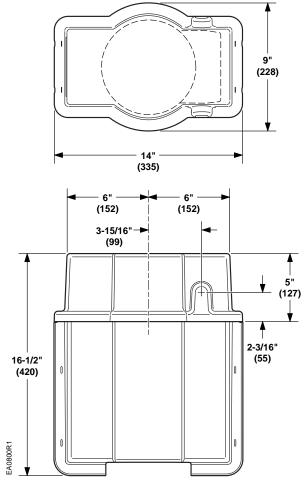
Dimensions of the 599-10065 Weather Shield shown in Inches (Millimeters).
